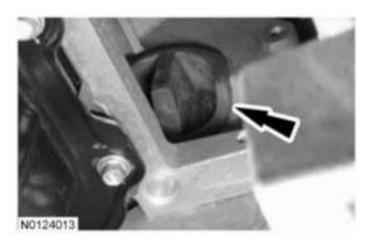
Locating Wiring Harness Retainers Courtesy of FORD MOTOR CO.
